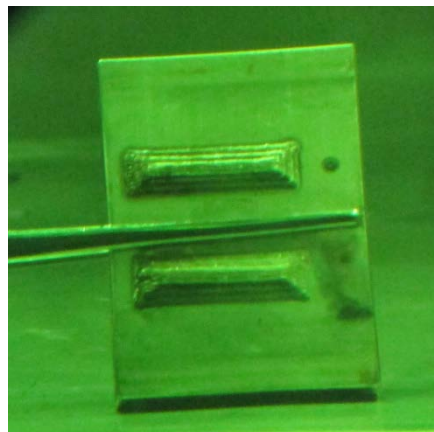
Completed Laser Welds 1 and 2 on Irradiated Coupon 304D-1; Welds 3 and 4 were Completed on the Other Side of the Coupon (Not Visible).
